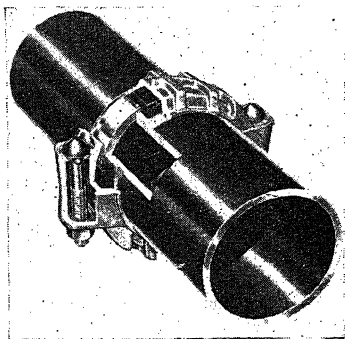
Victaulic coupling for grooved-end cast-iron or steel pipe.
